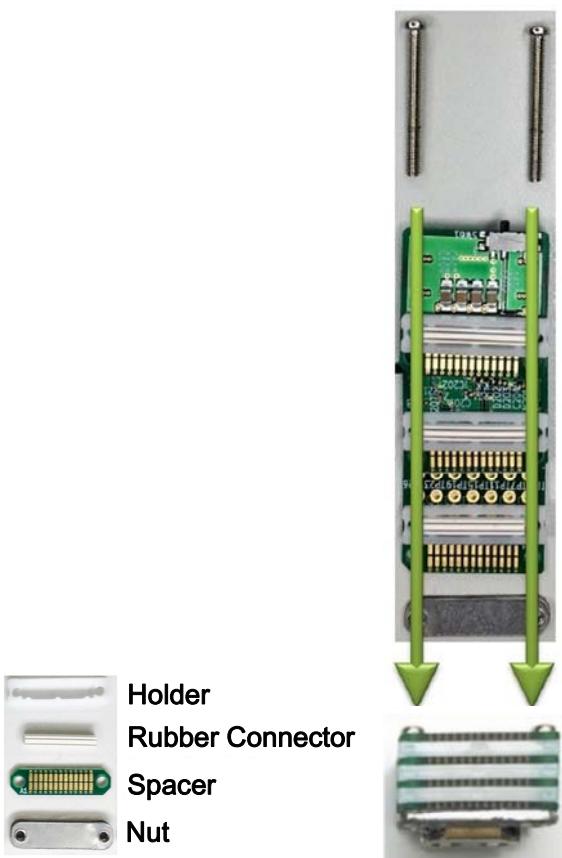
Assembly of Leaf PCBs and rubber connectors.
